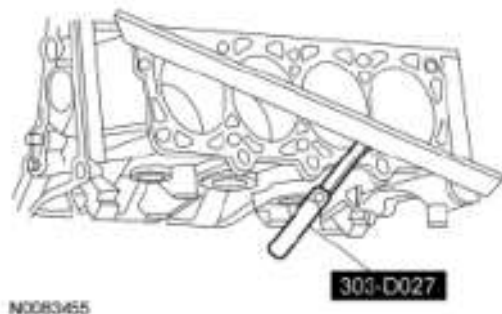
Inspecting Cylinder Block For Flatness
